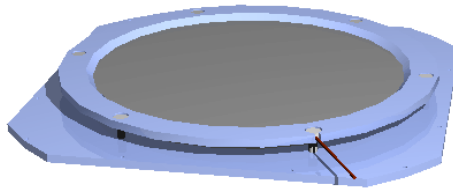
Assembly of MCP-stack - Stage 3-3 (DLD120 and HEX120)
